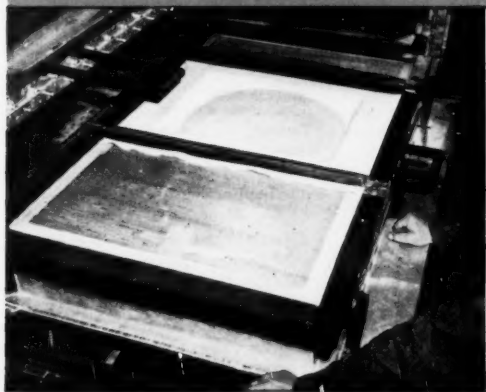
After heating cycle, vacuum valve is opened and sheet snapped down against plaster form in fraction of second
